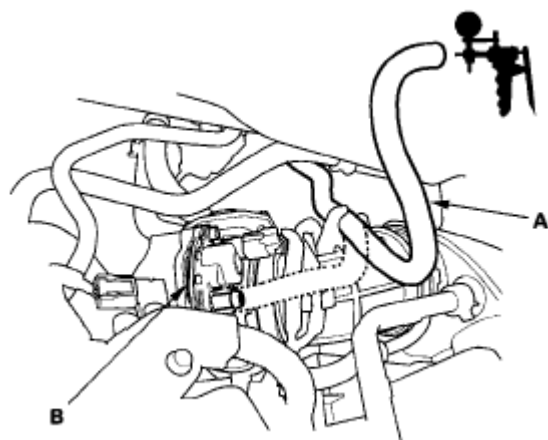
Disconnecting Vacuum Hose (Purge Line) And EVAP Canister Purge Valve
